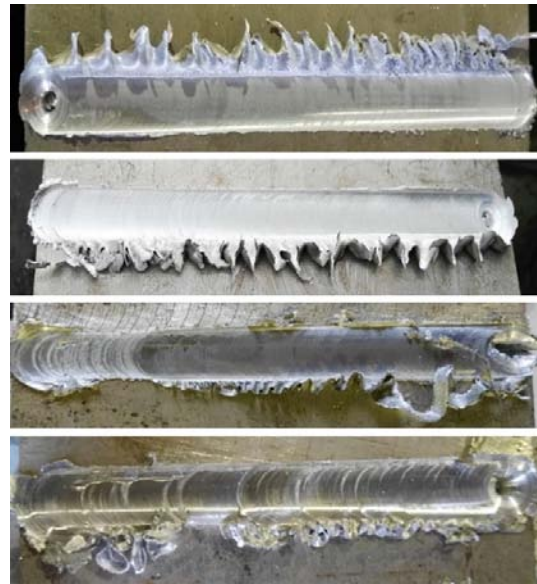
FSW plates welded in counterclockwise direction at rotational speed of 1120 rpm and welded speed of 14, 21, 45 and 66 mm/min
